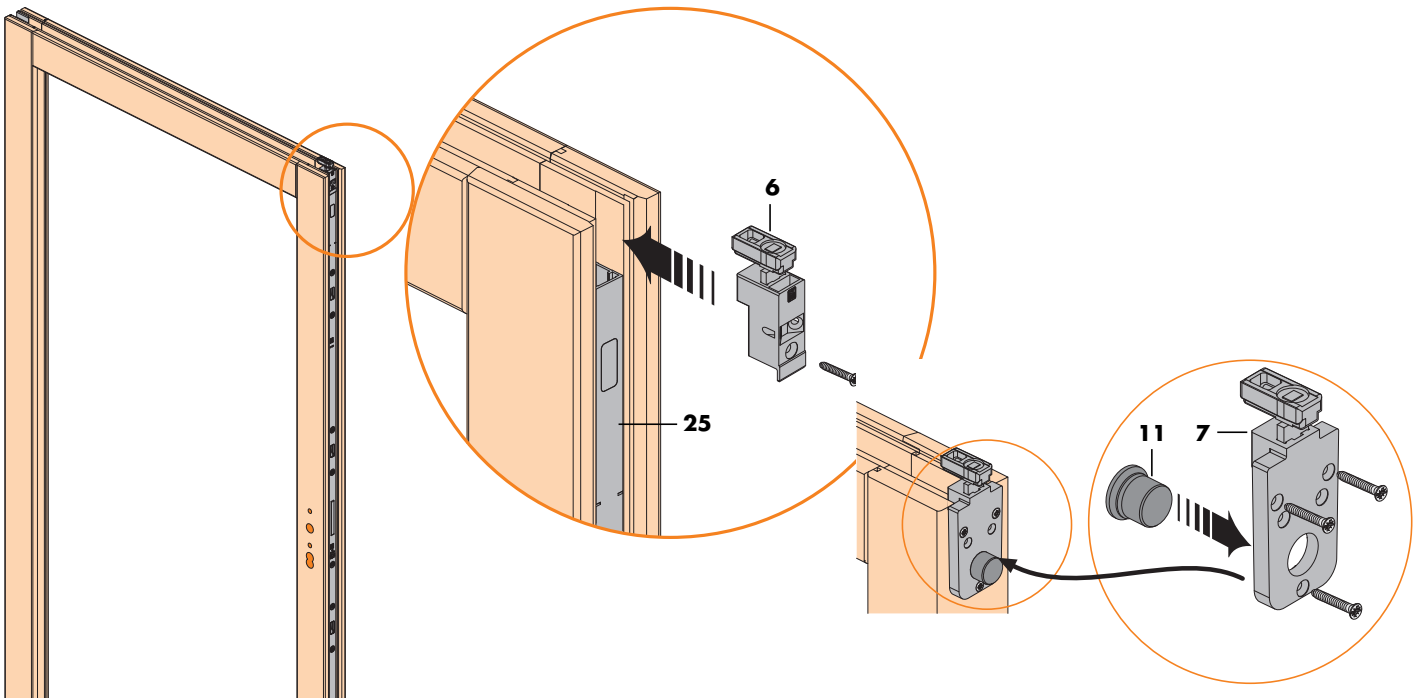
Mounting the top front guide (6) and stop (11) top rear guide (7) to the slider sash
